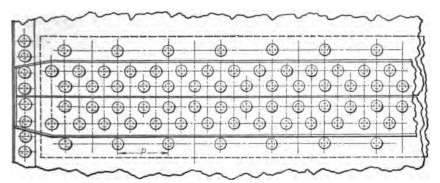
BUTT AND DOUBLE STRAP JOINT, TRIPLE-RIVETED.
